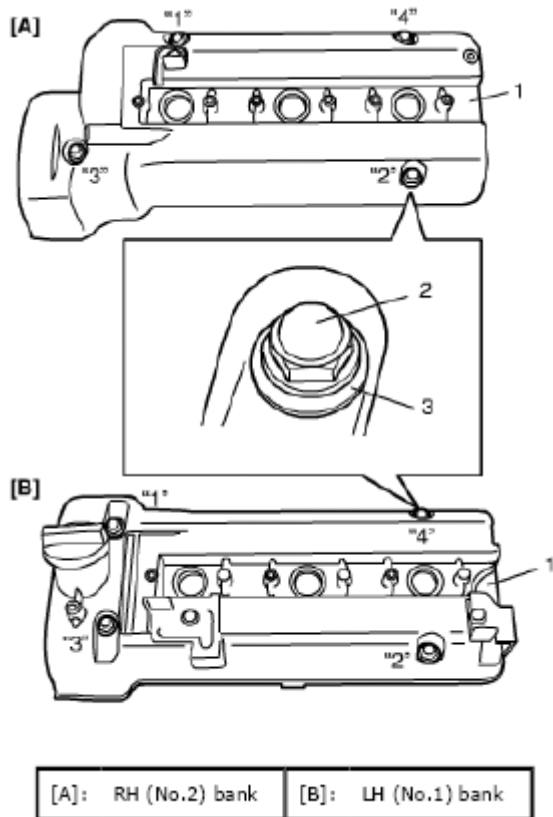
Identifying Spark Plug Hole Gaskets
